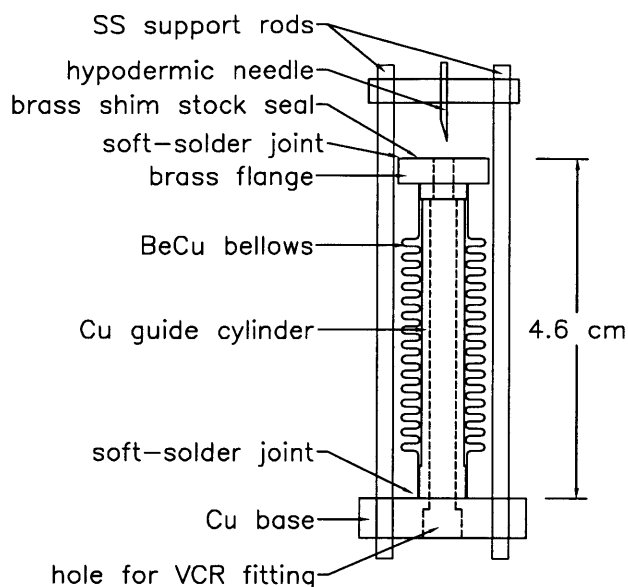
Cross-section through the pressure relief valve. A VCR fitting [78] brazed into the base makes a superfluid tight vacuum connection to the superfluid jacket through 2 mm ID tubes. The BeCu bellows tube fits around a Cu guide cylinder that prevents buckling and keeps the hole in the brass flange aligned with the hypodermic needle. A thin brass sheet is soft-soldered to the brass flange to provide a vacuum seal that is easy for the needle to puncture.
